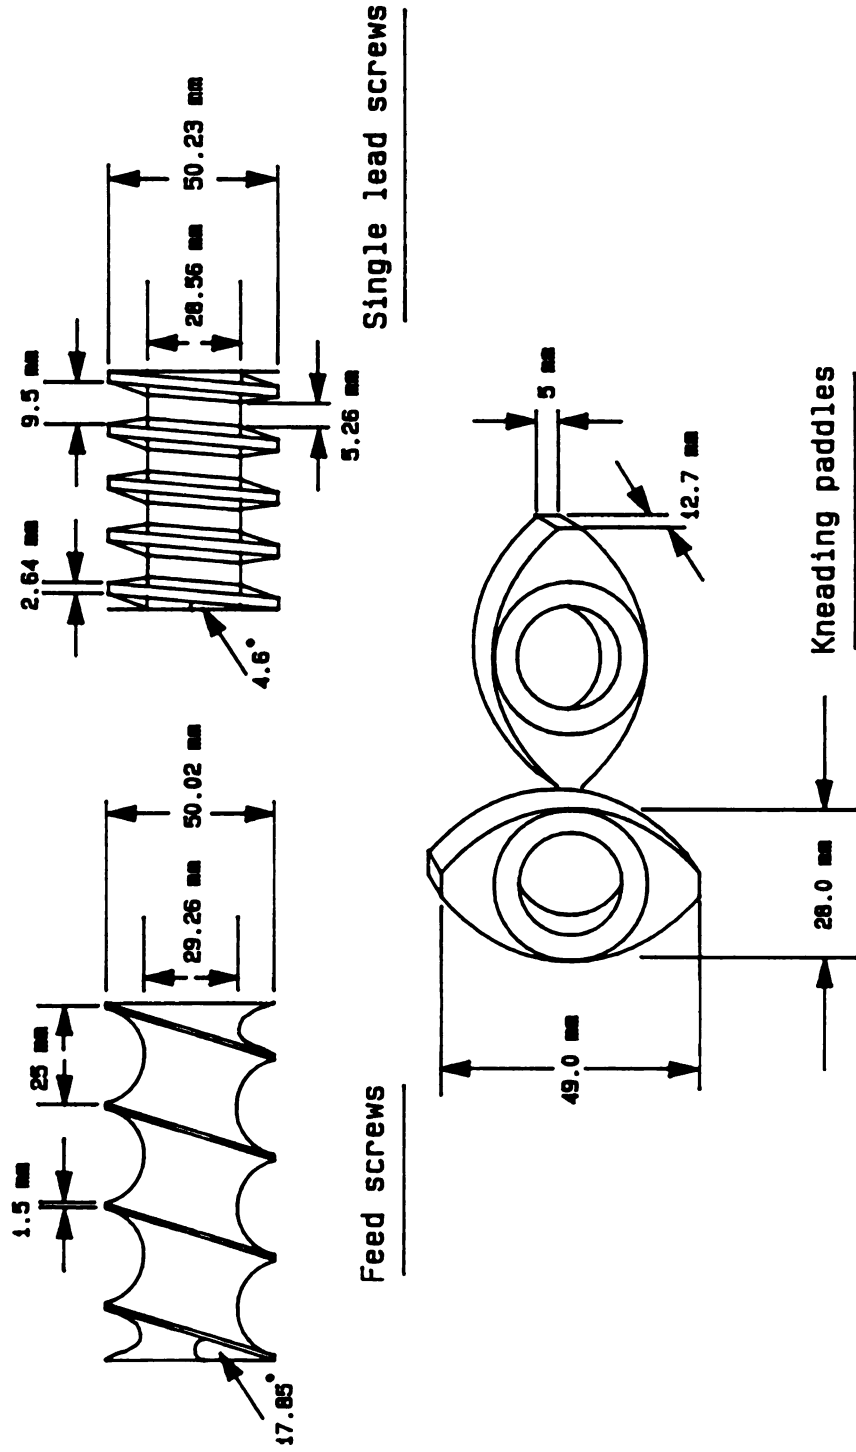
Dimensions of screw elements used in the MPF-50D Baker-Perkins twin screw extruder.
